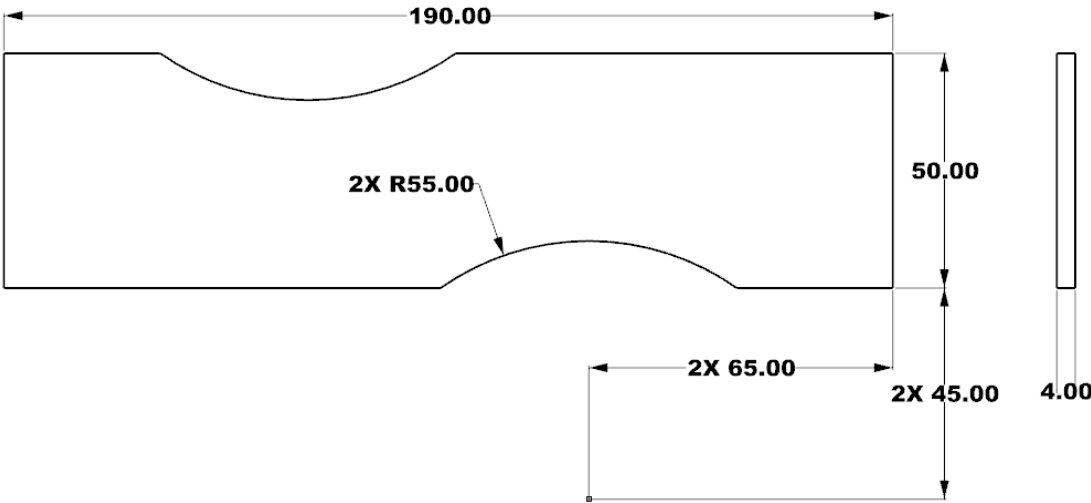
Details of the rectangle with necks geometry (All dimensions are in mm)
